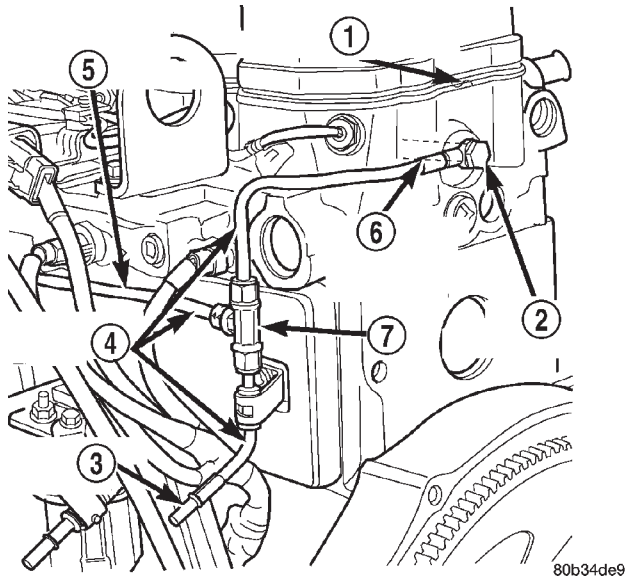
Fuel Return Line at Rear of Cylinder Head
